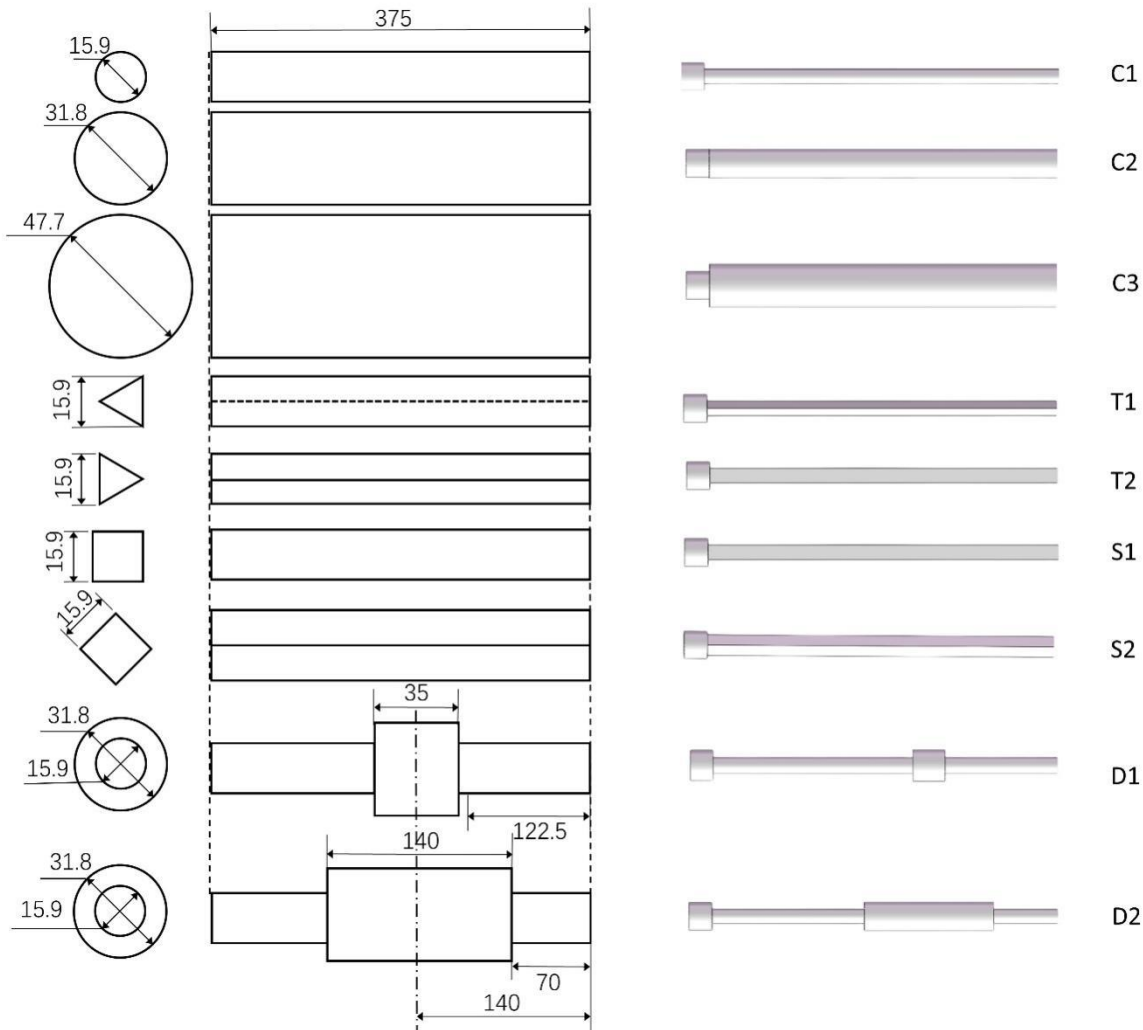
Shapes and dimensions of the tested targets (Left: Cross-section; Middle: Side view; Right: 3D view. Units: mm)
